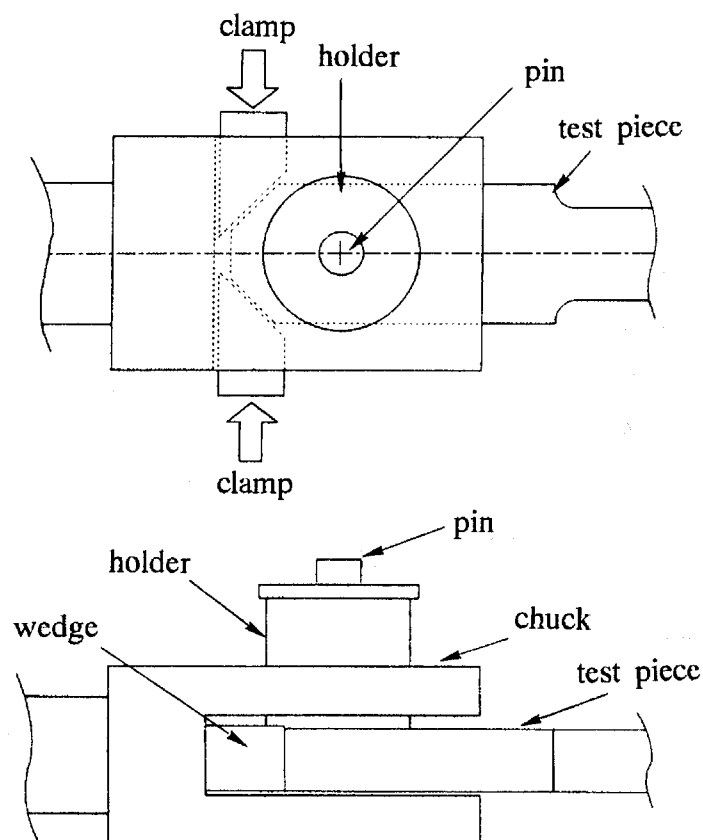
Configuration of holding specimen to prevent weld deformation
